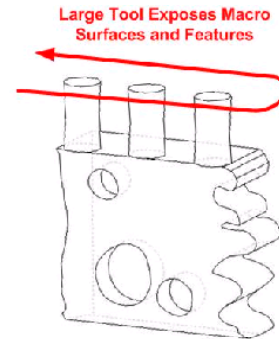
Use of Blanket Exposure Tool to Micromachine Macro Features
